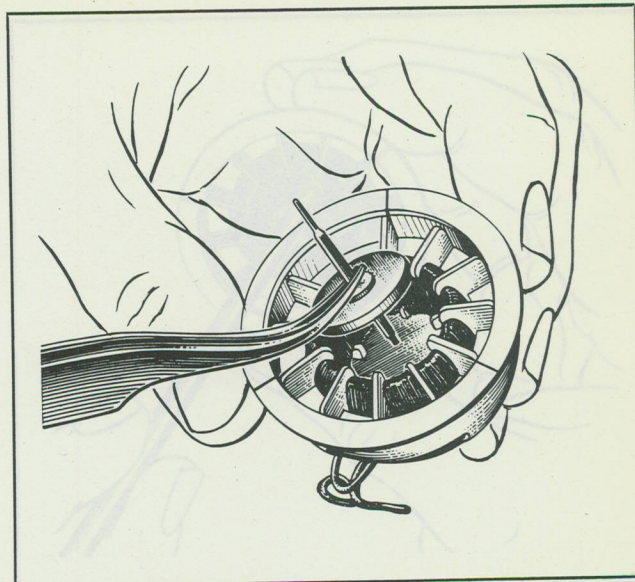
F—Withdrawing Magnesyn Shaft Assembly From Stator
